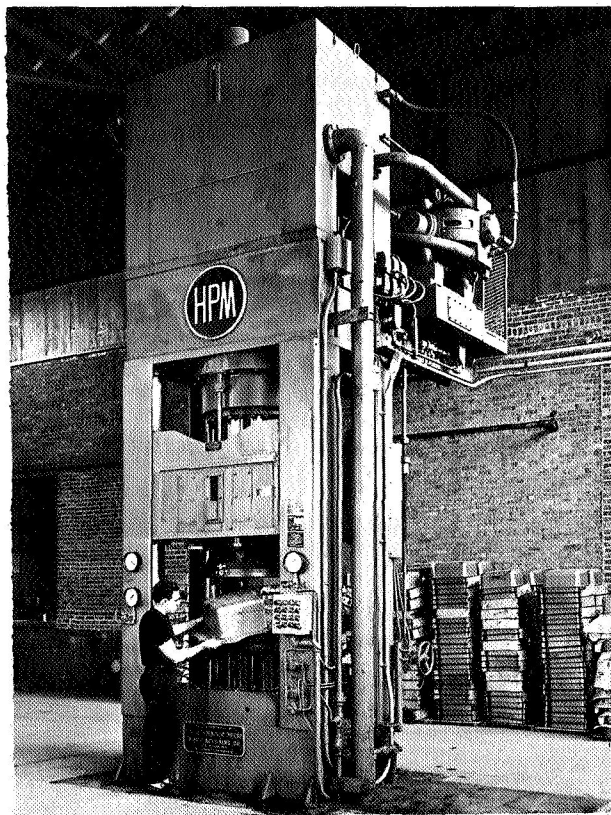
800-TON PRESS EQUIPPED WITH A 600-TON DIE CUSHION USED FOR DRAWING STAINLESS STEEL SINKS
